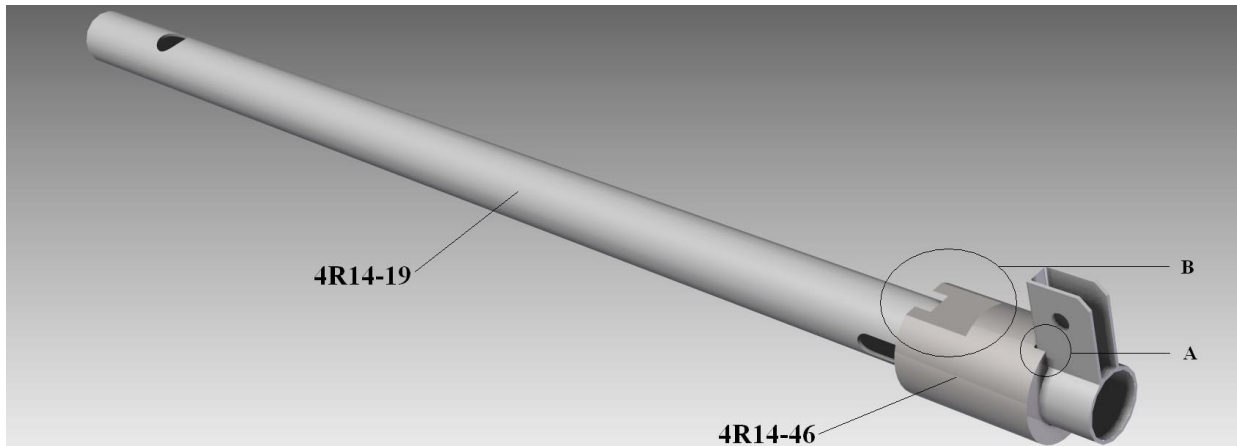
, bush for brake pedal blockage and lower pedal guide tube.
